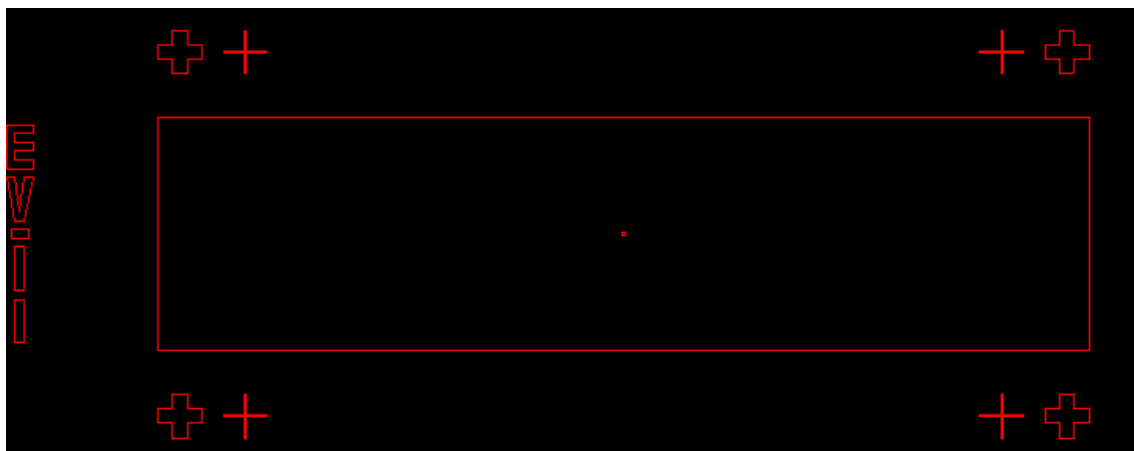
The AutoCAD drawing of Evaporation Mask.
